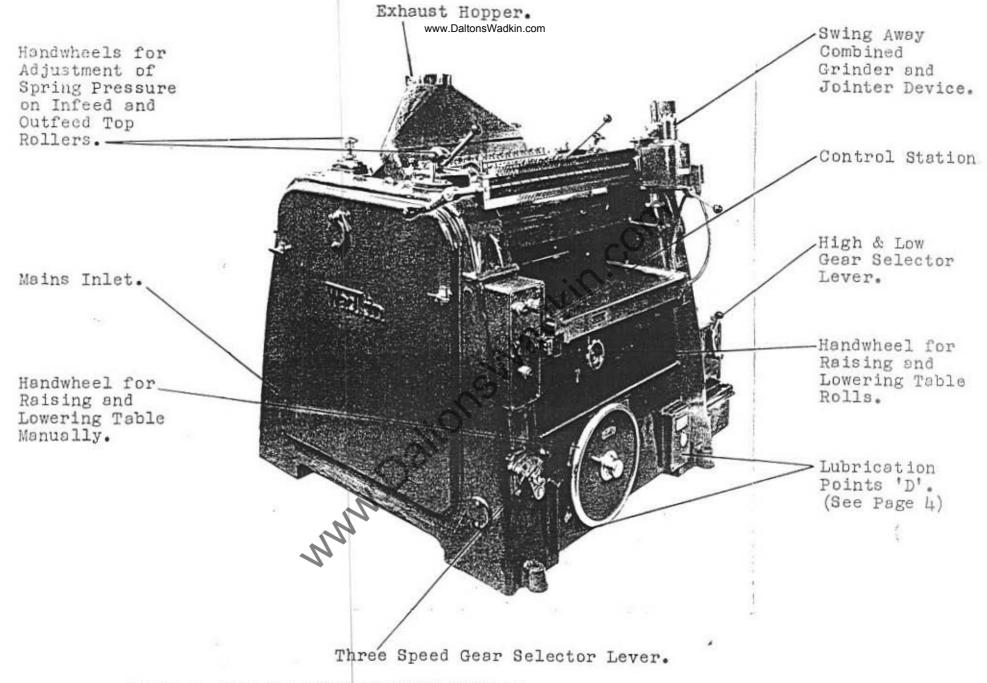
GENERAL FRONT VIEW OF MACHINE.
